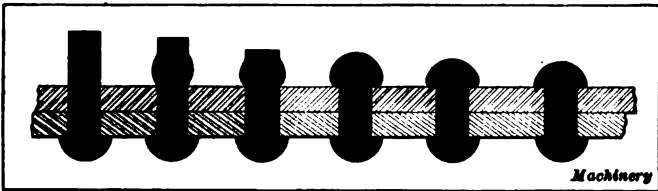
Sequence of Operations in upsetting a Rivet in Electric Welding Machine
